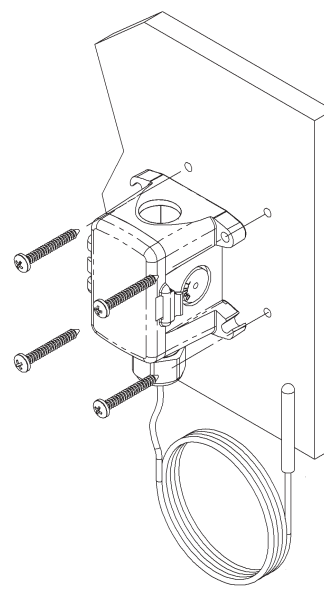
Mounting the BAPI-Box 4 (BB4) Enclosure
